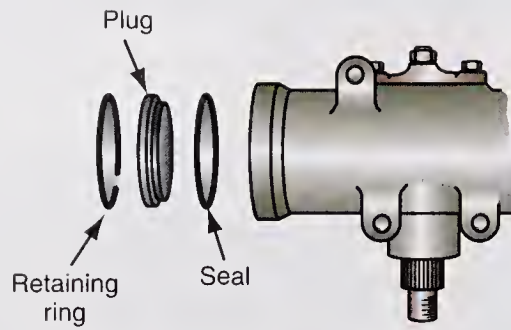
Removing steering gear end plug, retaining ring, and seal.
